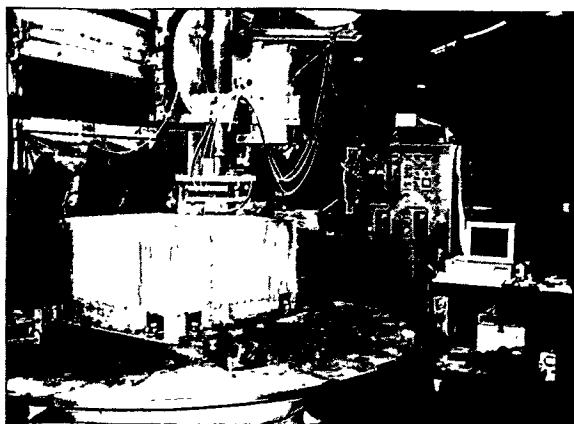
Vertical lathe set-up used to wear-test single PDC and TSP cutters.
